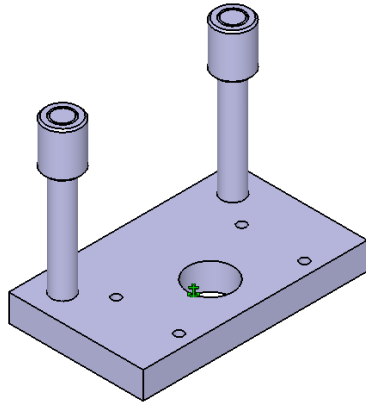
Assembly after placing the second set of Guide Pillar and Guide Bush
